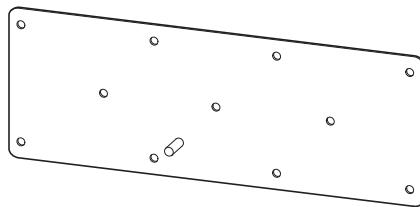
Blanking plate (FS6, FS7) with locating points and earthing stud
